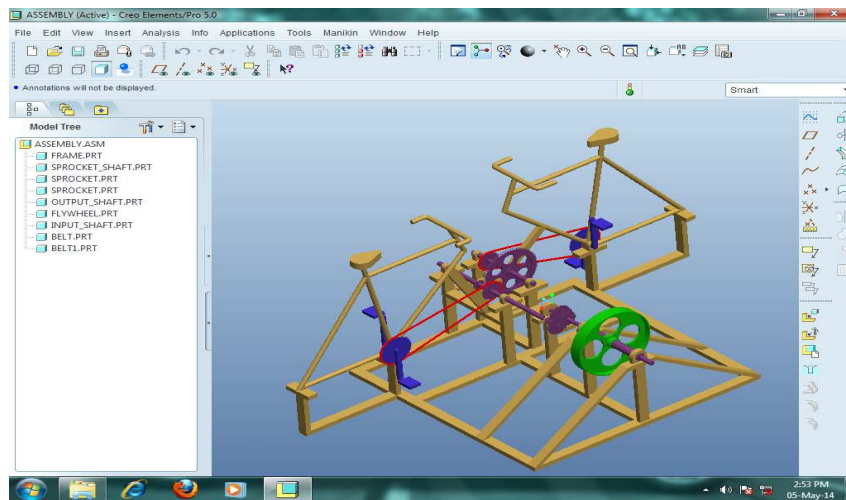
Assembly Mechanism of Cad Modeling of Fabricated Human Powered Flywheel Motor with Quick Return Ratio One by Using Pro-E
